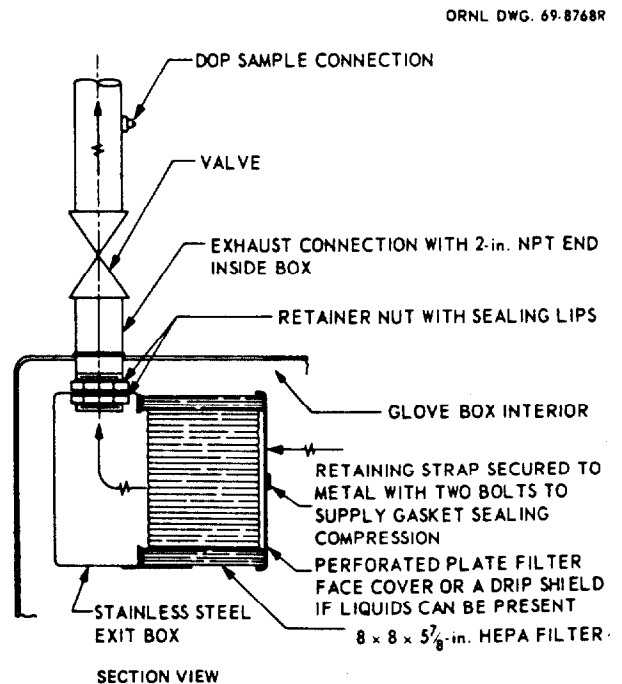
Open-face HEPA filter with exit box mounted inside glove box (in-box) for exhaust service.
